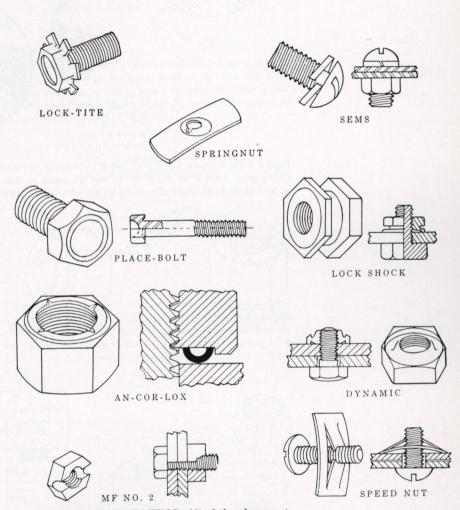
SPRING SEATING: All of the above nuts and bolts are designed to provide spring seating. They are free running until seating. Then some sort of spring action occurs which tends to lock the fastener in position. Palnut is typical. Made of sheet metal, body distorts when seated to provide locking action. In the Place-Bolt, the head distorts to provide the locking. In the An-Cor-Lox, a special auxiliary member is compressed. Both body and fingers of Speed Nut are deformed to provide extra strong locking and long spring action. Speed Nut can be pushed over screw until seating commences. Others must be threaded full length of screw section to seat them.
